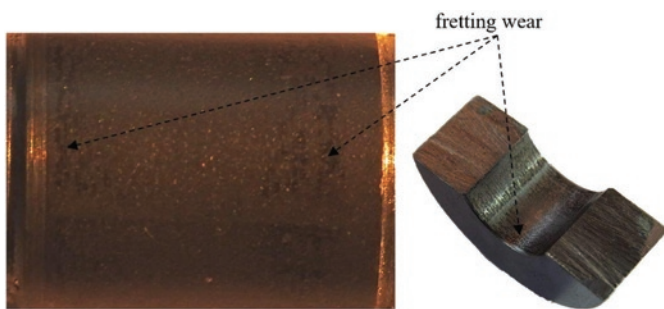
Fretting wear at the surface of the shaft with a CrN+a-C:H:W coating and at the sleeve hub
